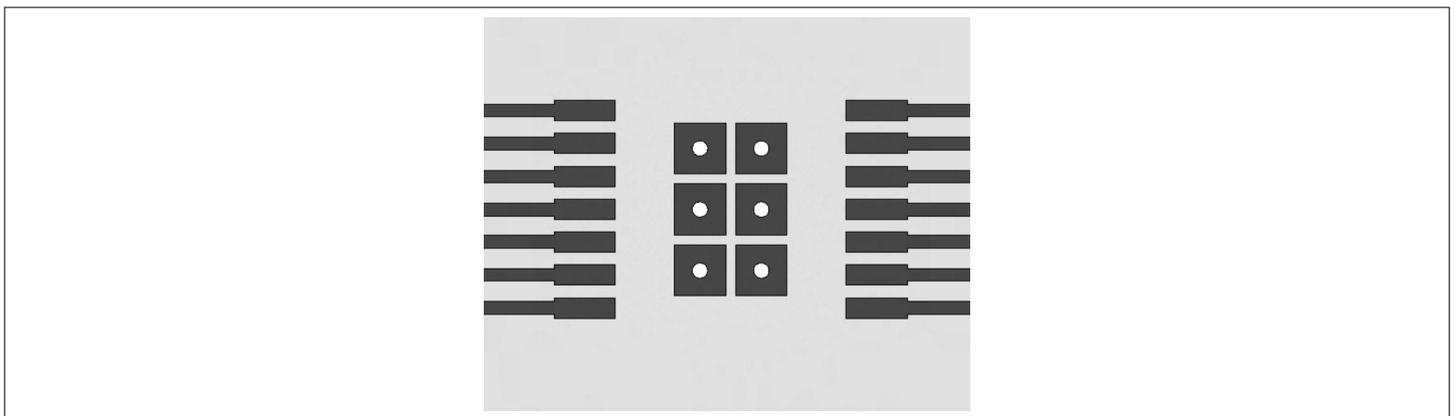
Thermal vias on PCB for 2s2p PCB setup
